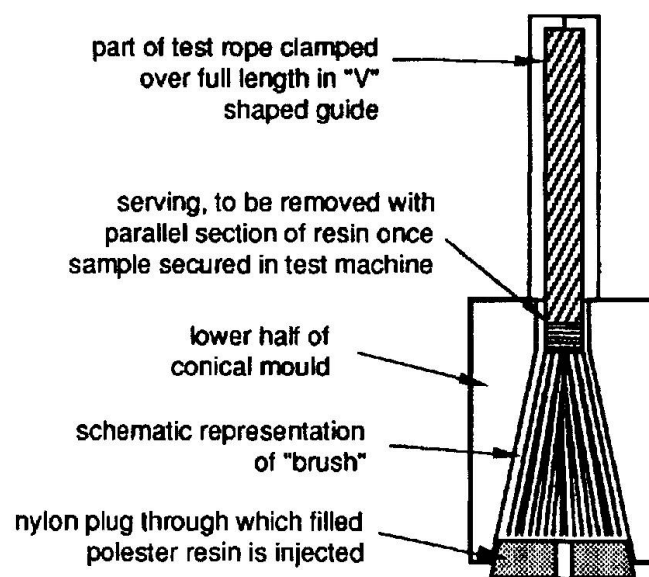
Arrangement employed for moulding conical ends of test samples, injecting resin vertically upwards into the mould.
